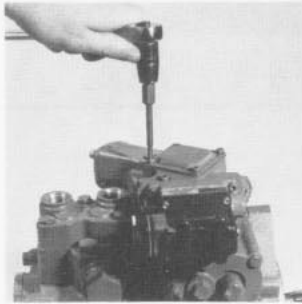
Remove Control Cover (SN 02-XX-XXXX and Below)
